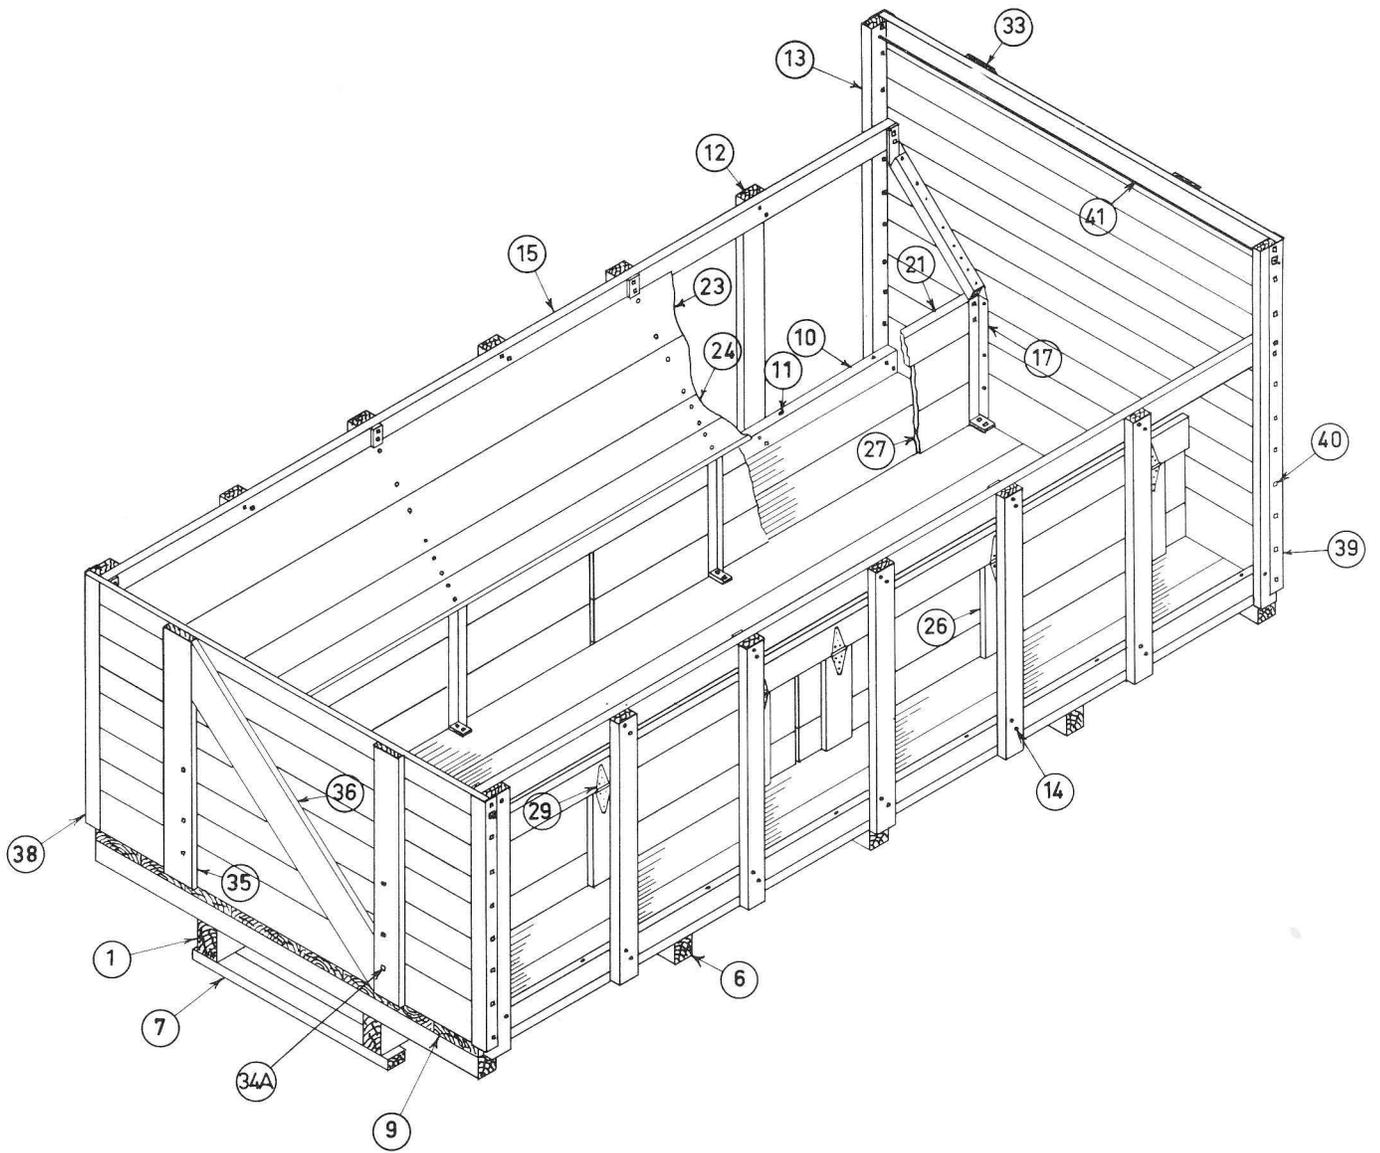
Make up the front and rear endgates. Nail temporarily into position. Cut the angle iron pieces (38 and 39). Bolt them to the corner 2 by 4 uprights with bolts (40). Make up the tie rods (41) and install them at front and rear, 2 in. from the top of the stakes.
